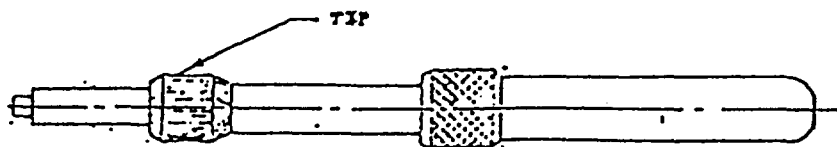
Type IV, Class 1, Style B, tang break-off tool for unified coarse and fine thread sizes 5/16 (.3125) through 1/2 (.500)
